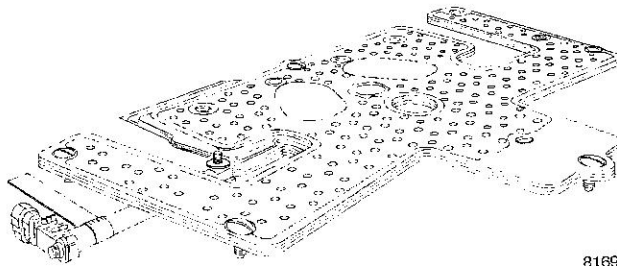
SEAT WEIGHT Bladder & Pressure Sensor
